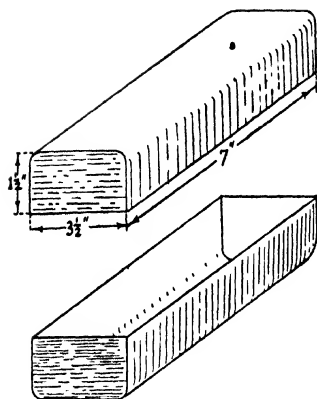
A ventilator cover for a lantern. In the lower drawing it is shown upside down
